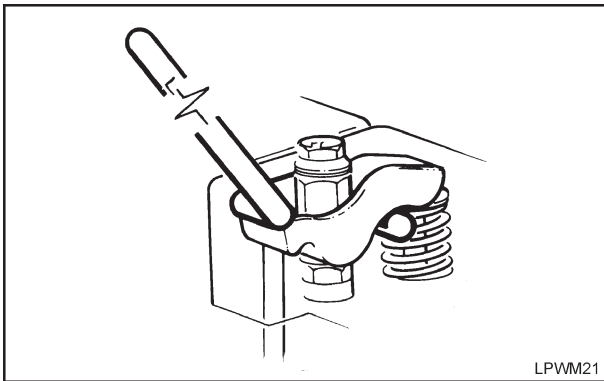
Valve Tappet Compressing Tool 317-50107
